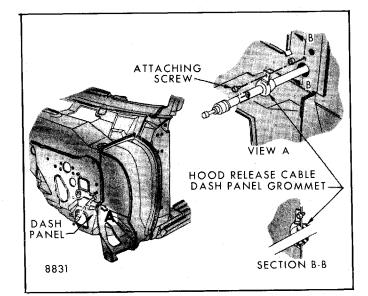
Hood Release Cable Dash Panel Grommet
